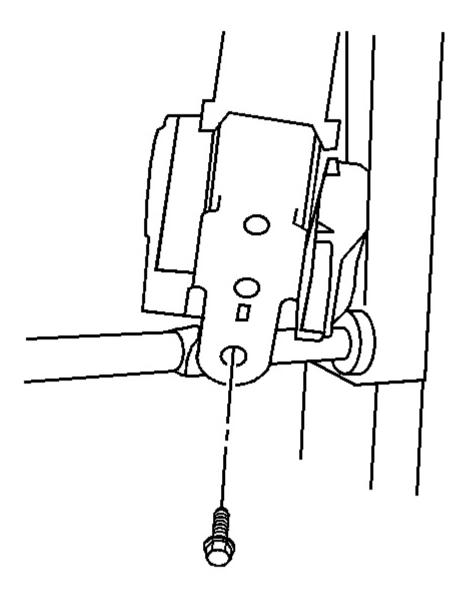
Lower Seat Belt Retractor Bolt - Left Front Courtesy of GENERAL MOTORS CORP.
